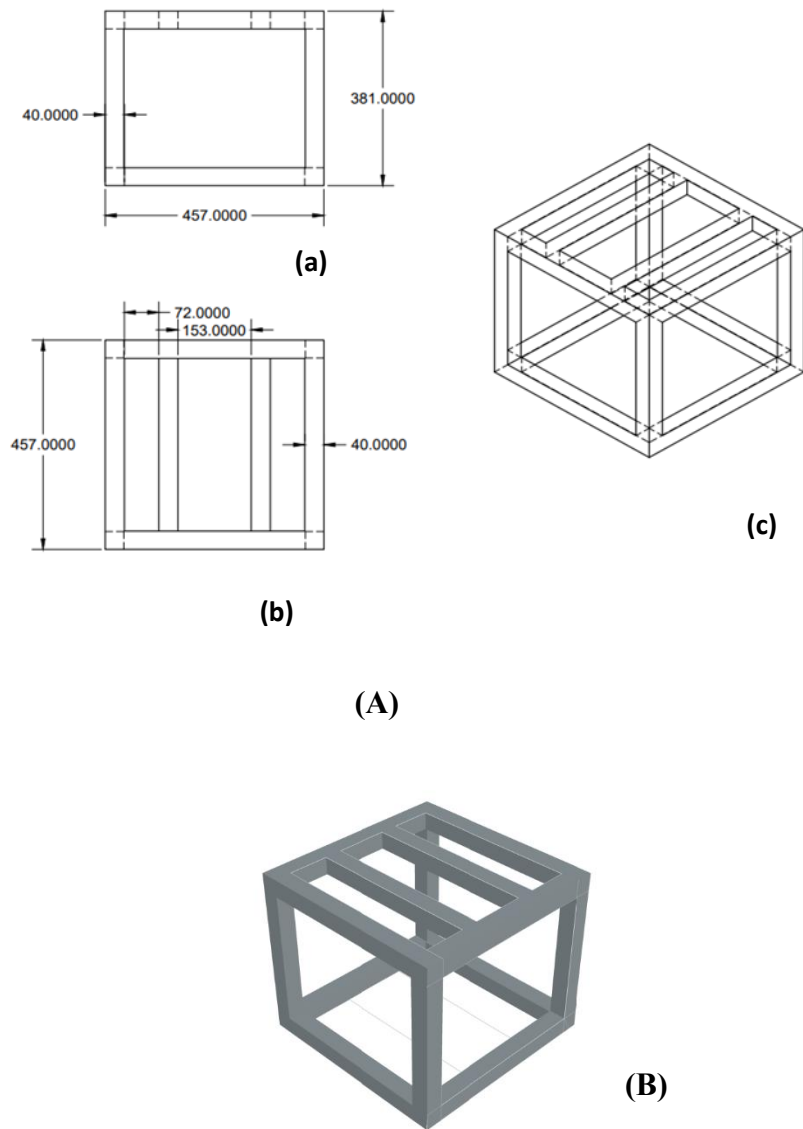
A) Isometric projection of frame assembly a) Side view b) Top view c) Isometric view
